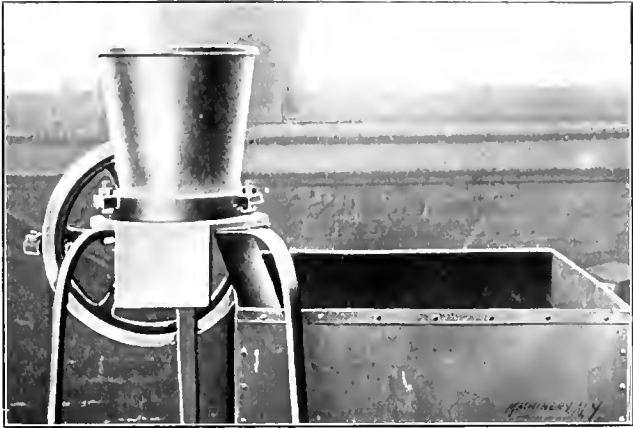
Coke Crusher Built on the Bone Mill Principle
